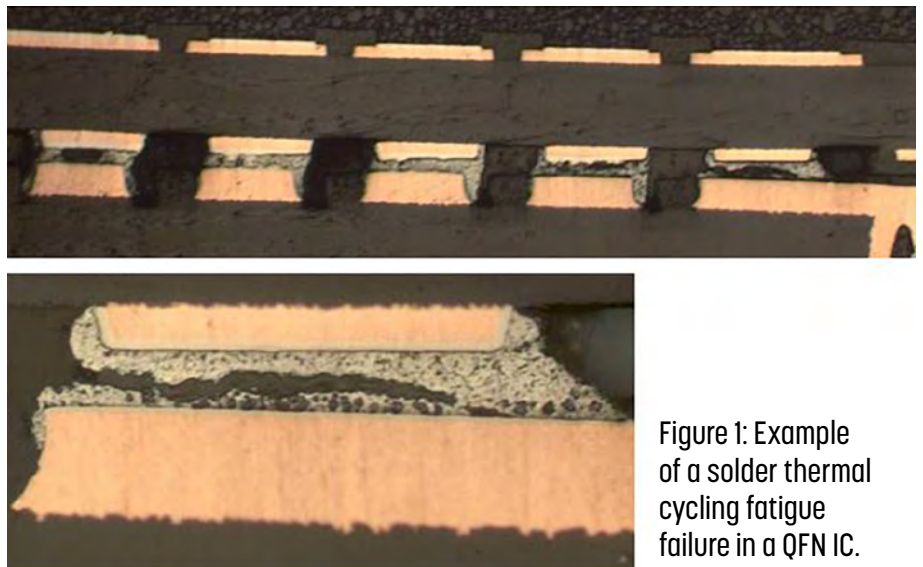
Example of a solder thermal cycling fatigue failure in a QFN IC.
